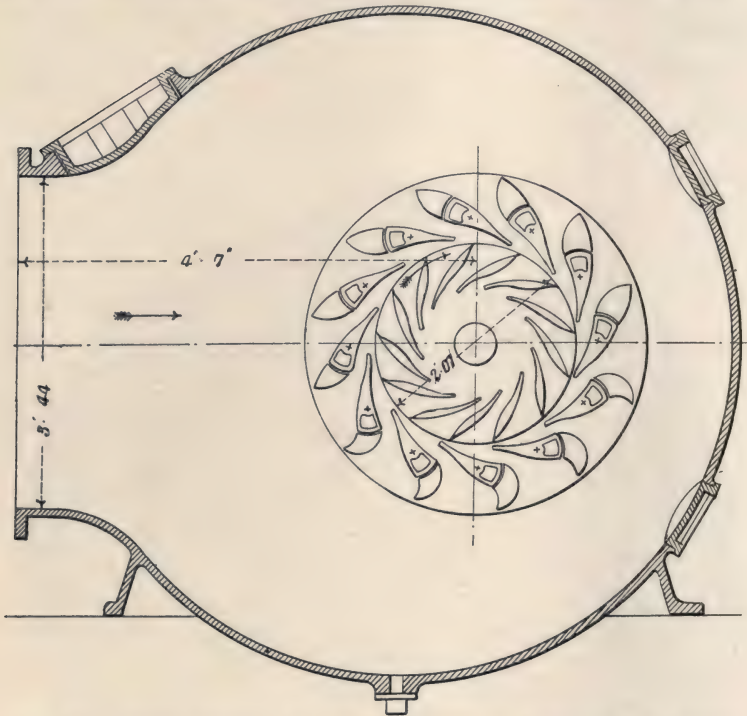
Section through wheel and guide blades of Mixed Flow Turbine.
